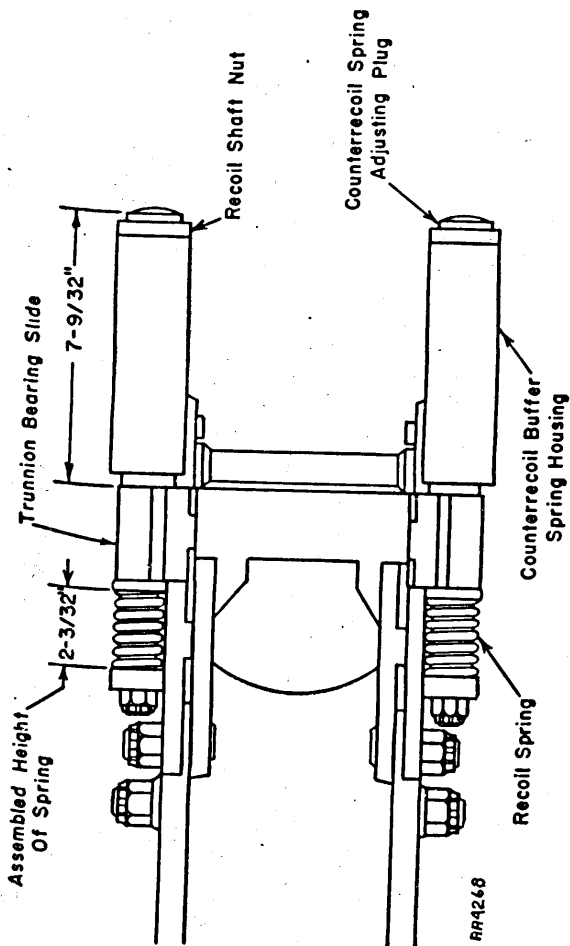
Upper recoil and counterrecoil mechanism.
